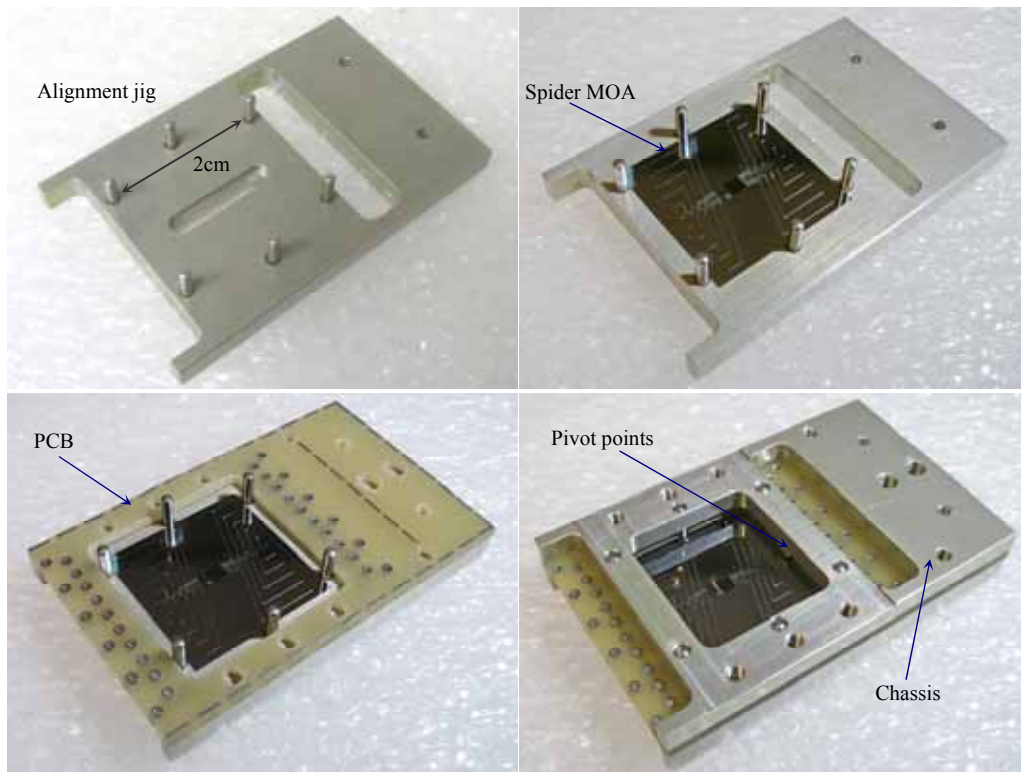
Pictures of the alignment jig which would be used to align and assemble the PZT segmented actuator, the 2cm×2cm silicon spider MOA the PCB and the mounting chassis. The packaging structure has been conceived and designed by Carl Meggs at the University of Birmingham and it was manufactured at MSSL.
